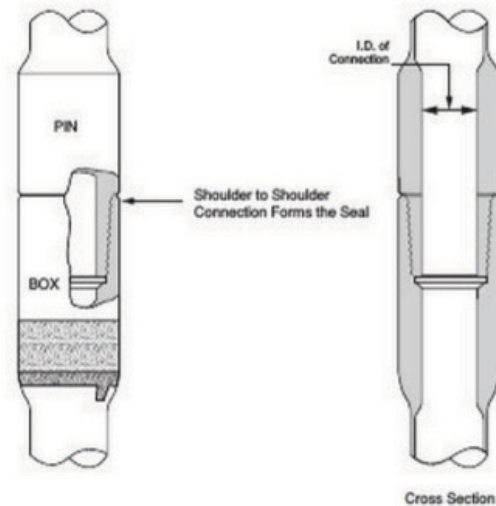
Sketch of a Tool Joint with the Threaded Rotary Shoulder Connection (Jack, 2015)
